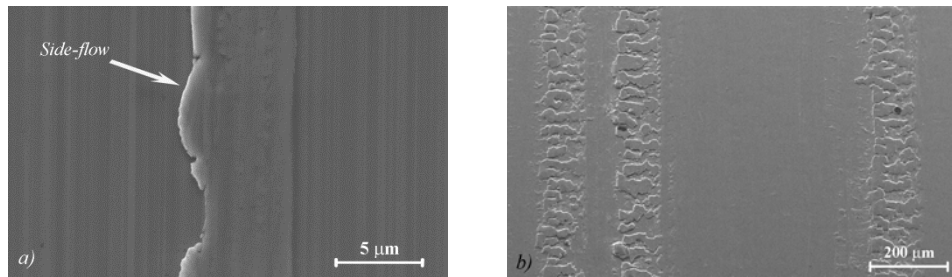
(a) Side-flow on the WRA machined surface ($v_c=350$ m/min, $f=0.15$ mm/rev) and (b) Severe side-flow on the surface machined with CCBN tool ($v_c=250$ m/min, $f=0.1$ mm/rev)
